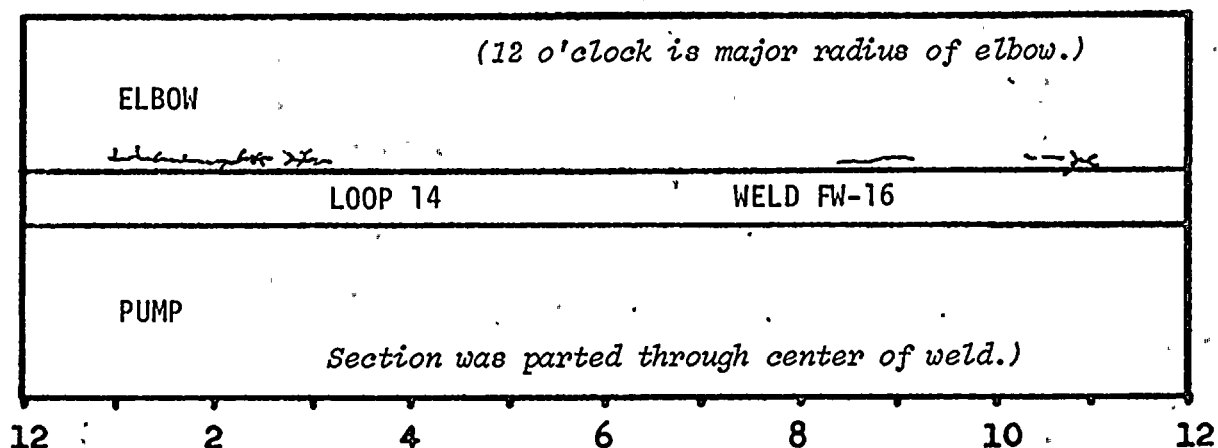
(Continued) Dye Penetrant inspection results, Loop 14 welds. (Refer to Figure 4 for weld locations.)
